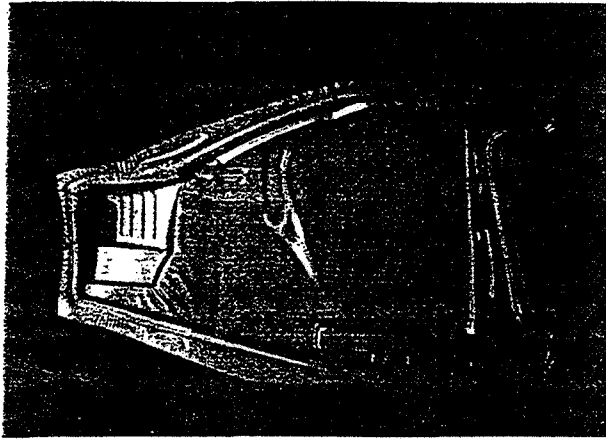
Aluminum body side inner stamping from a tailor-welded blank
